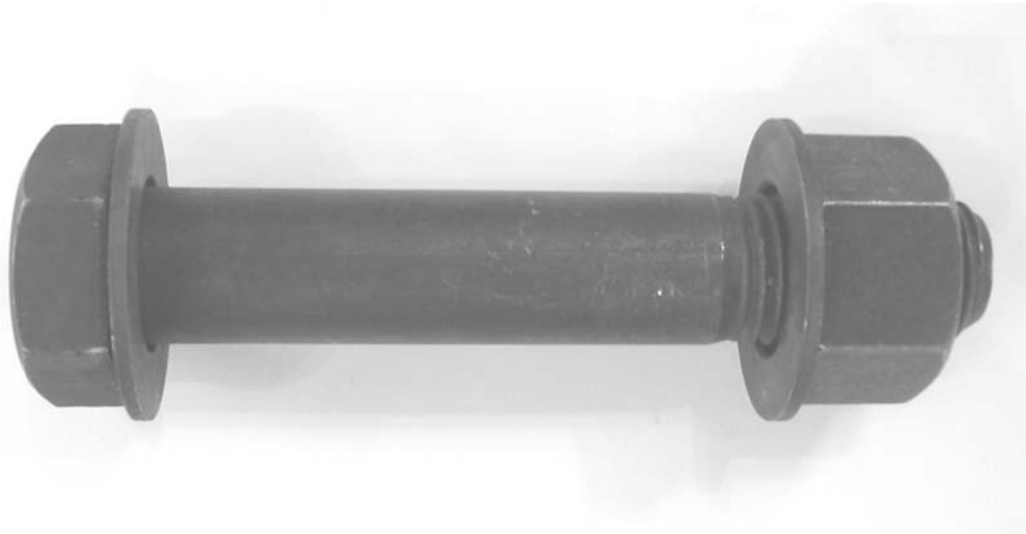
High-Tension, friction-Grip Bolt (1/4-in. diameter)
